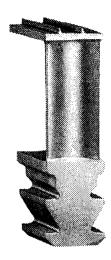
B8C design one-piece LP rotor blade with integral shroud.
